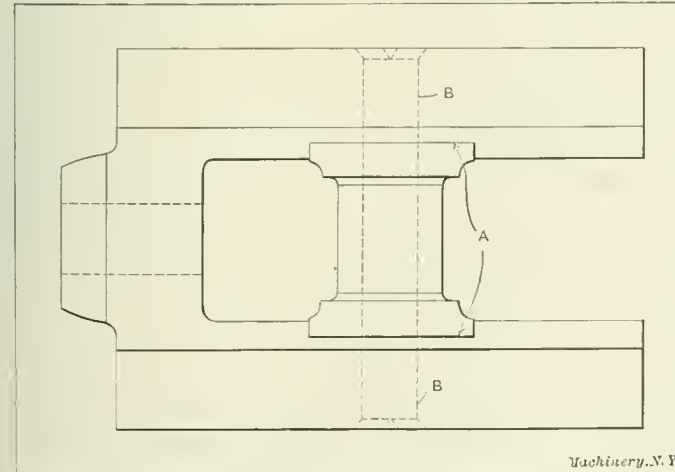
Method of Repairing Worn-out Wrist-pin by Fitting in a New Piece shown in Fig. 2 (A being the cross-sectional view) and secured there by pins B in the faceplate. The half of the wrist-pin toward the open end can then be machined with an
